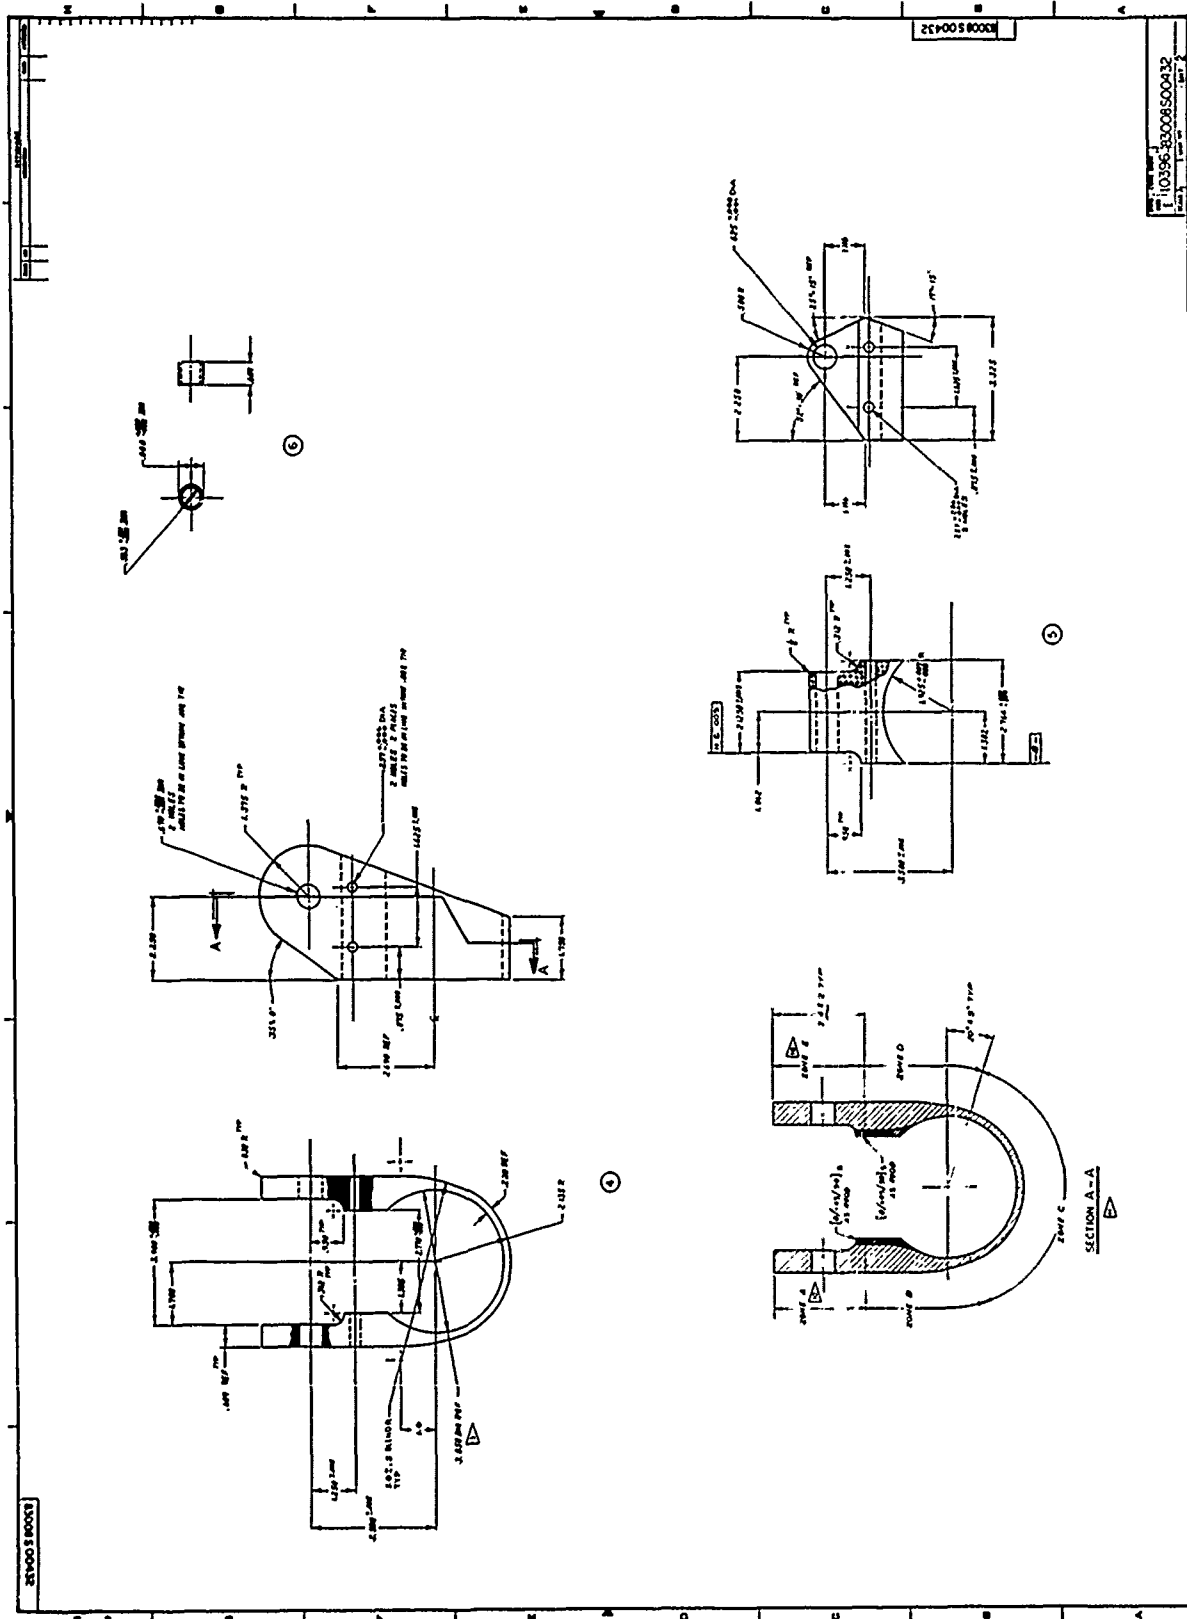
Torque Arm Attachment, Drawing 83008S00432, Sheet 2 of 2
